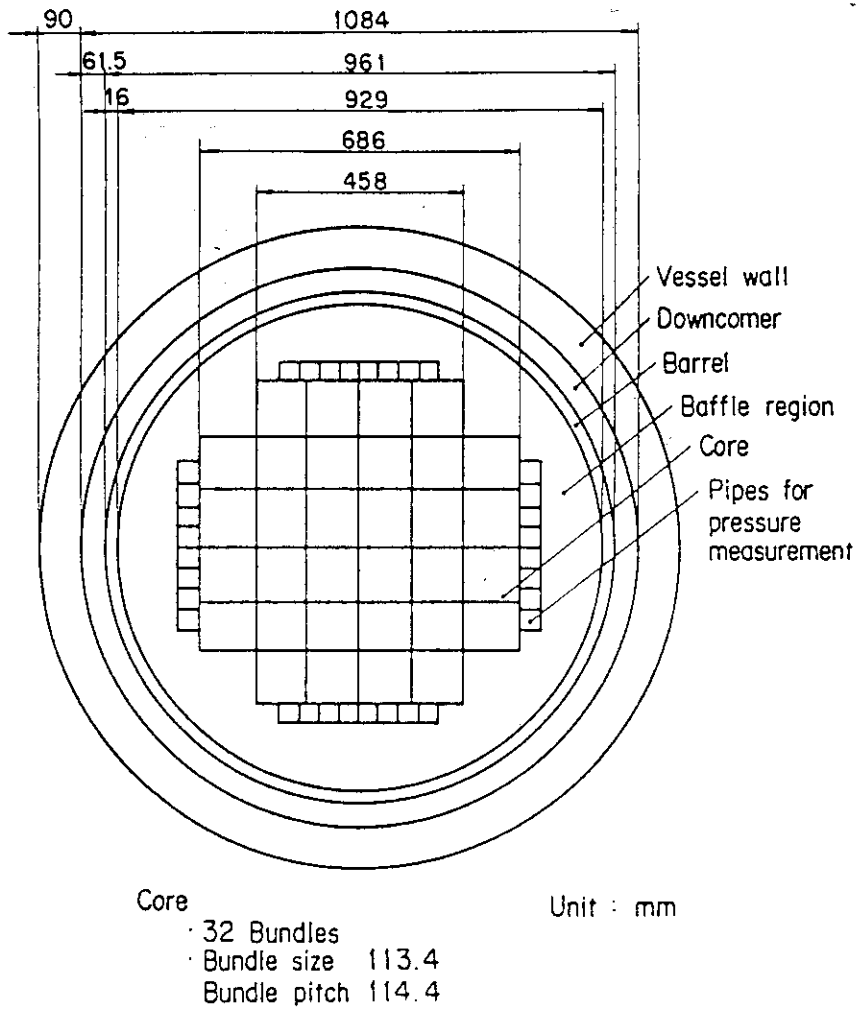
Dimension of CCTF Core-II pressure vessel cross section
